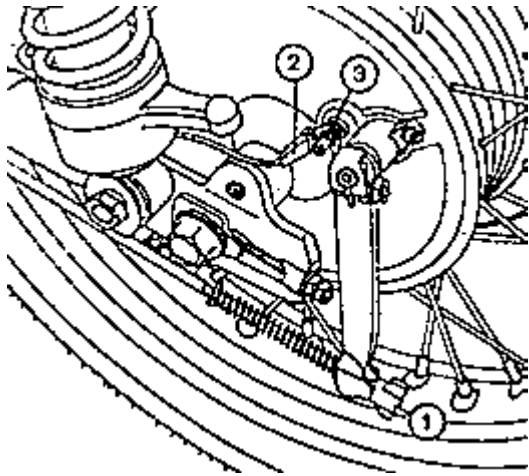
Adjusting the rear wheel brake and stop-light switch
